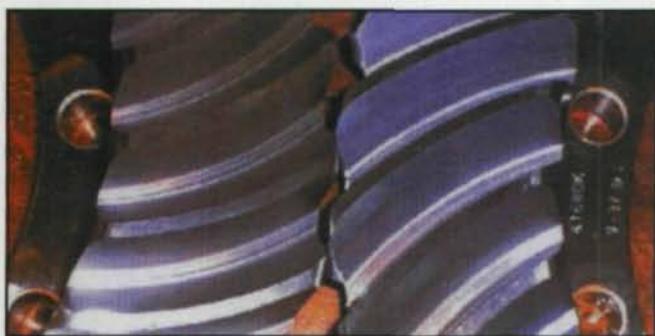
Left side—conventional, right side—cut with Spiroform cutter head.
